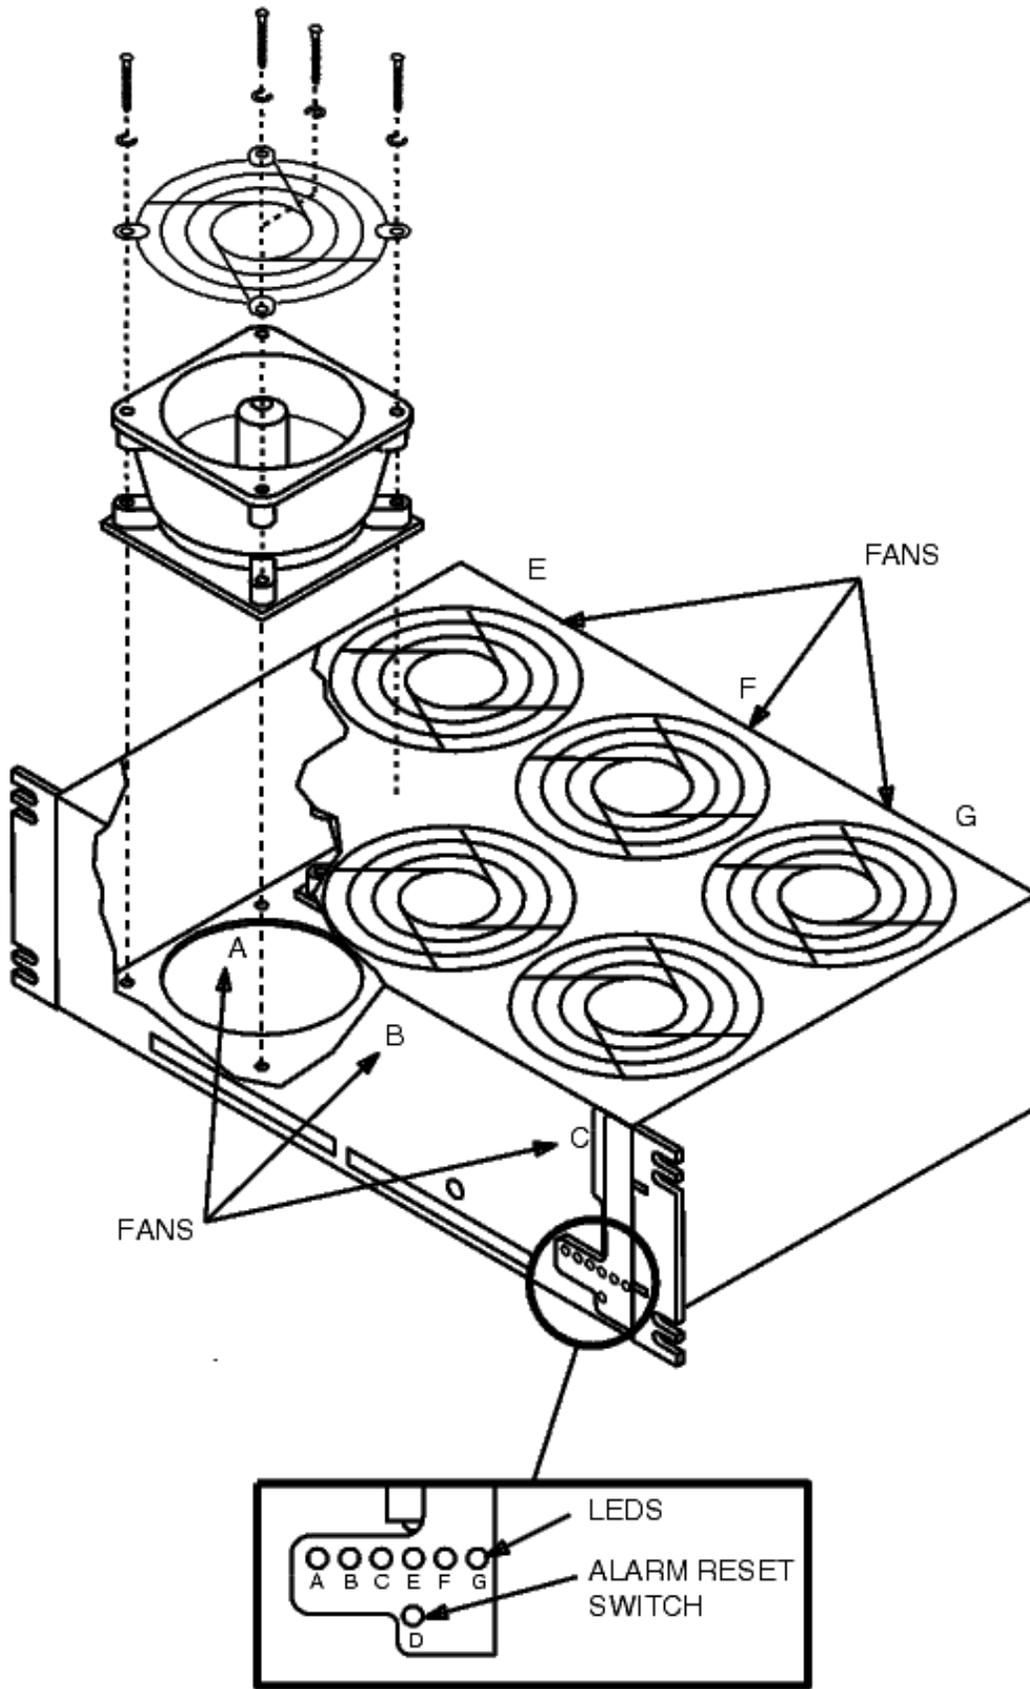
Fan Assembly J5D003BW-1 (6-Fan Exhaust)
